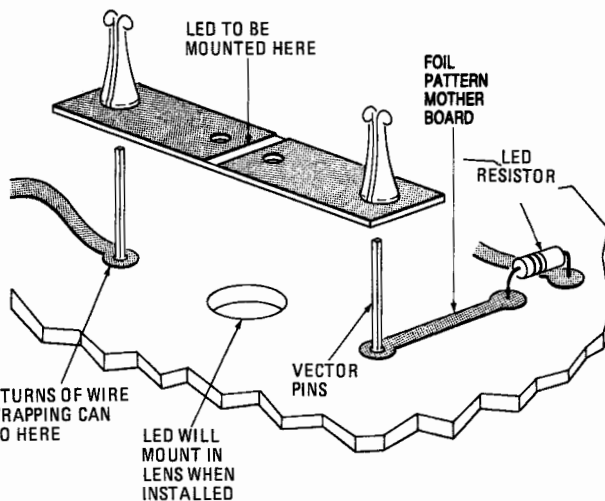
HOW LED MOUNTING STRIP forms a plug-in connector when mated to suitable pins inserted into the PC board.
